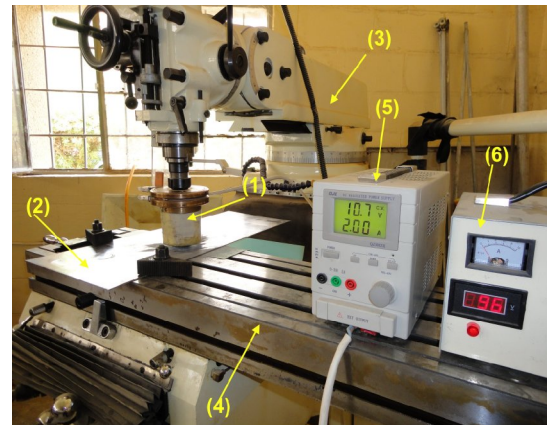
Magnetic Abrasive Device (1) Electromagnetic Inductor, (2) Workpiece, (3) Vertical Milling Machine, (4) Moving Table, (5) Dc Power Supply, (6) Table Speed Control.
